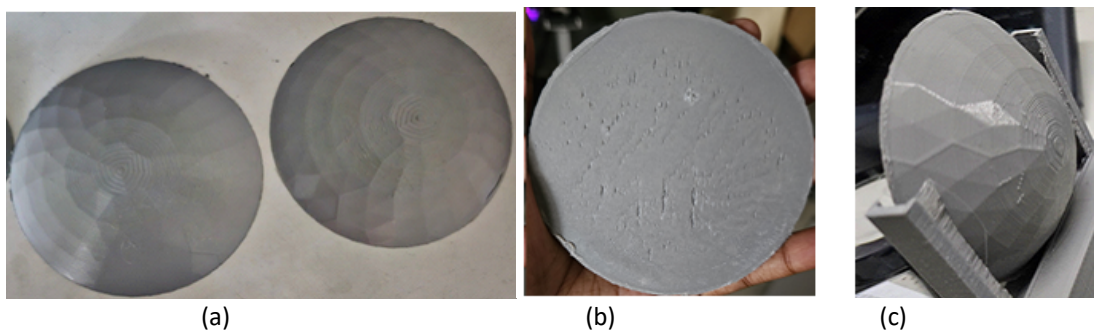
3-D printed dielectric lens (a) Front view (b) Back view (c) Side view
